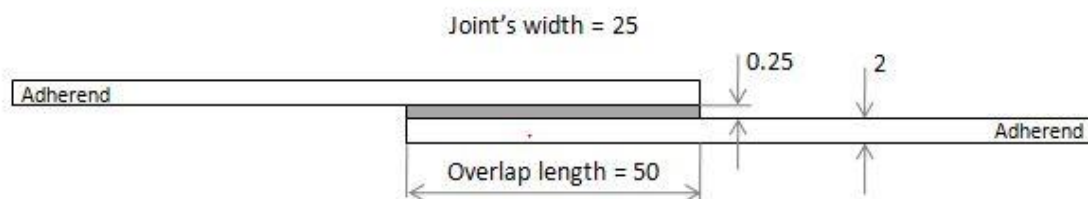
Single lap joint specimen geometry (not to scale, dimensions in mm).
